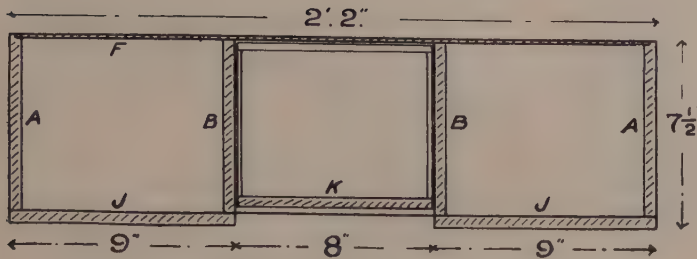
SECTIONAL PLAN: SCALE AS AT FIG. 3.
